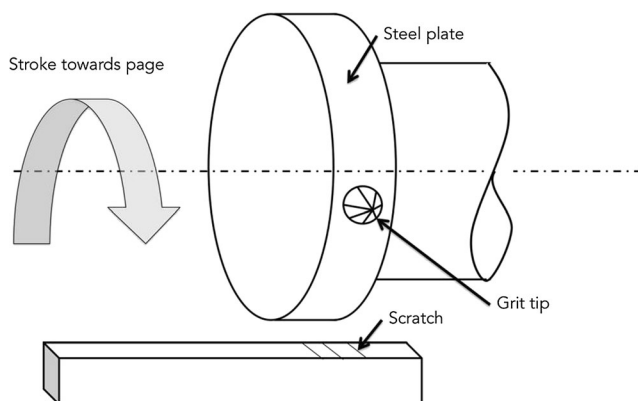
Makino A55 grinding centre machine setup for horizontal SG scratch test
